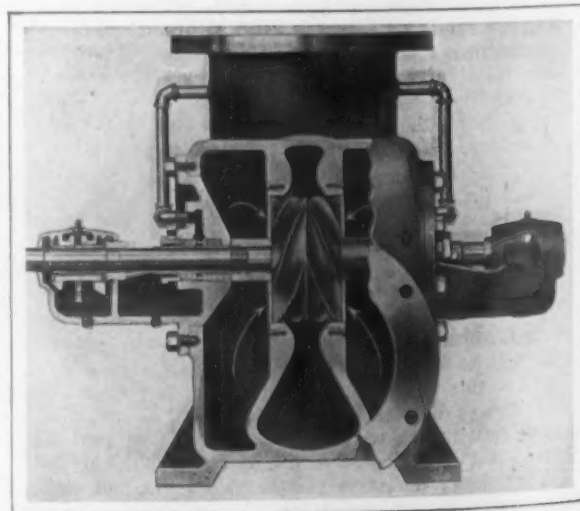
Section of the Pump Showing the Helicoidal Impeller in Place
